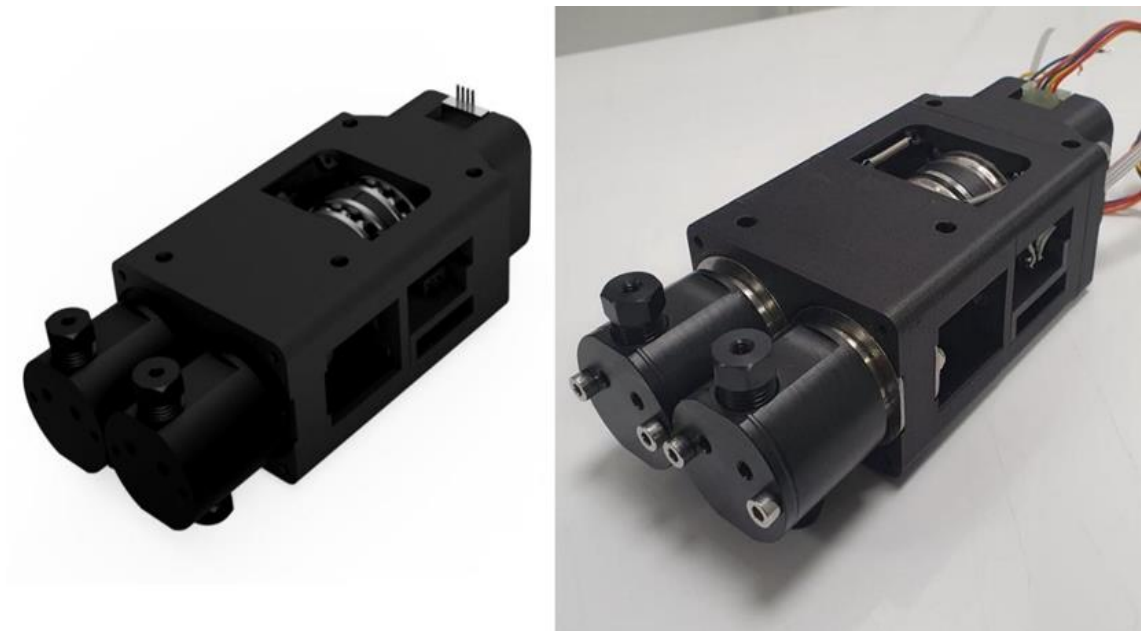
Final swash plate pump design. (Left) Render of design, (Right) Photograph of assembled pump.
